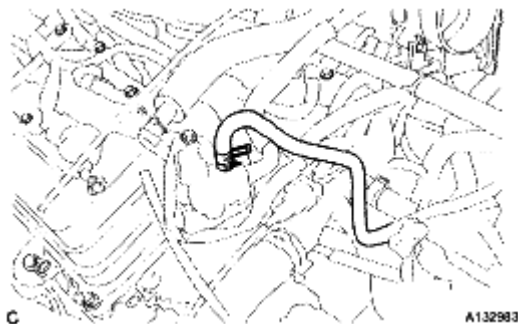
Identifying No. 1 Fuel Vapor Feed Hose Clamp
